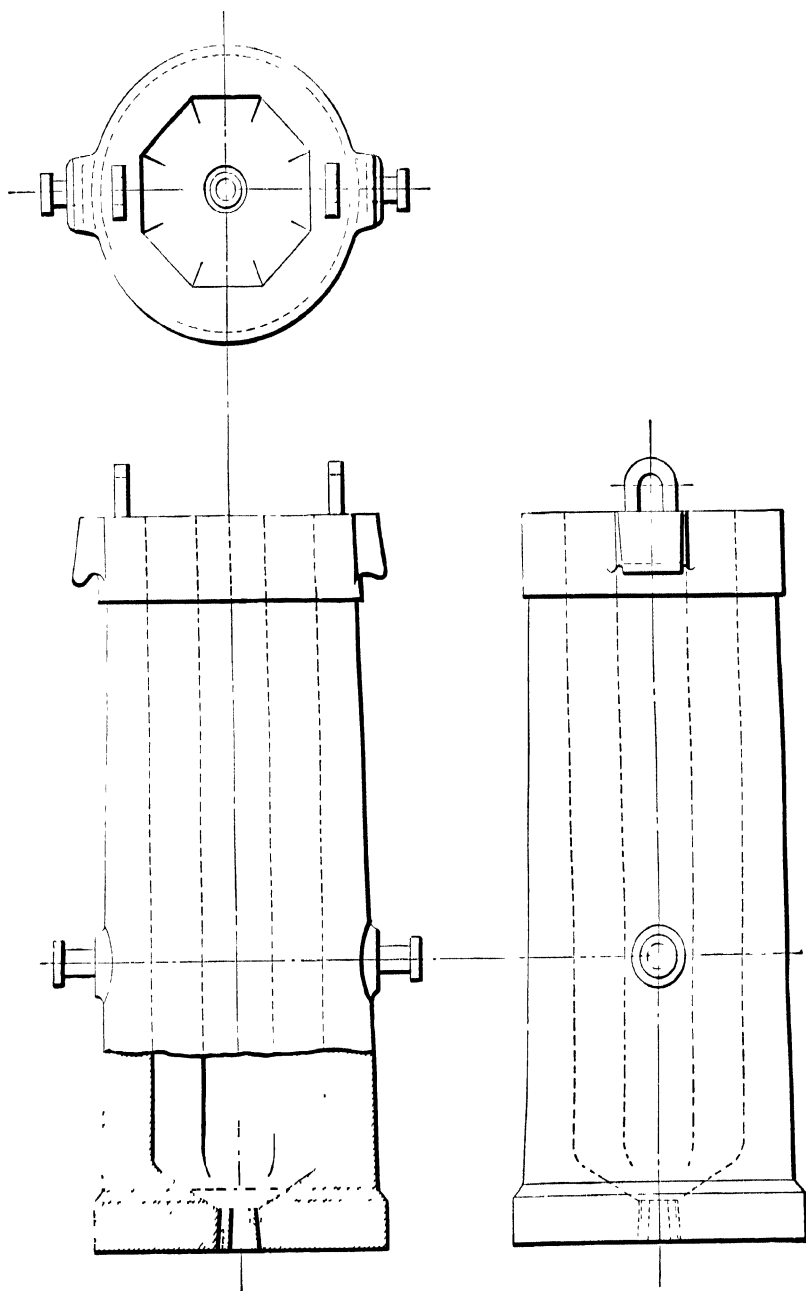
PLAN, PART SECTION, AND ELEVATION OF MOLD.
